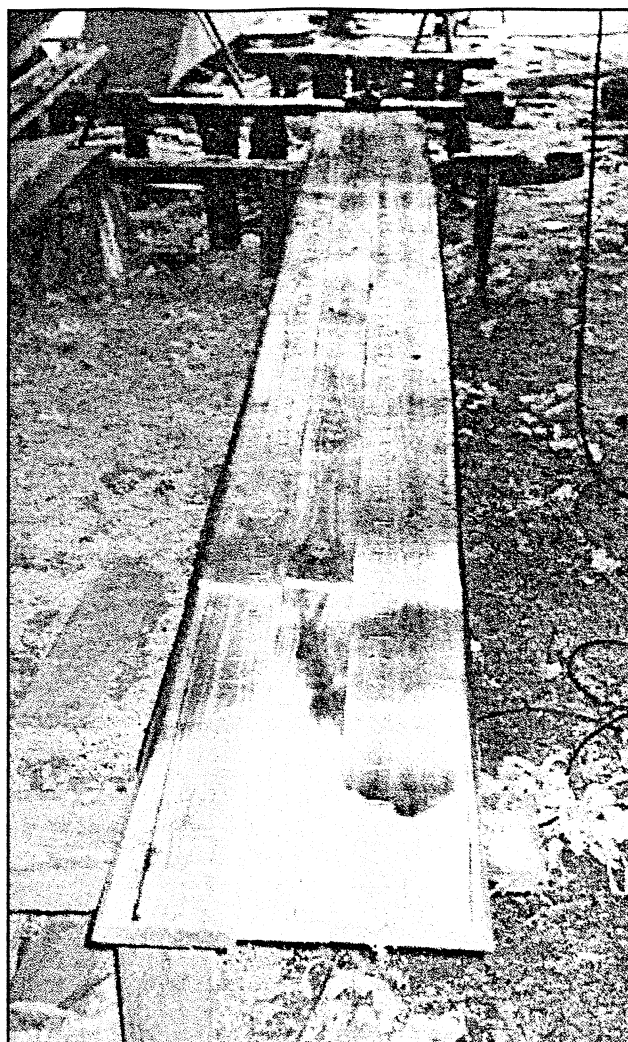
Small boat in Tanzhou being constructed planking first. Note edge-nailing along seams of planks. Charcoal can also still be seen on planks where fire was applied to induce a bend onto the planks. Note also the sawhorse arrangement, with the legs spiked down into the dirt floor for stability and adjustability.
